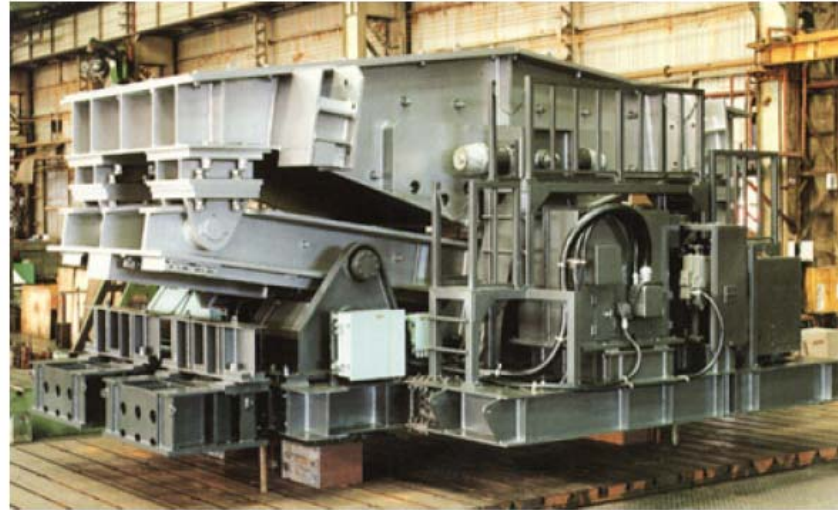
Shinsuku Park Tower (1993) installed with V-shaped HMDs.
